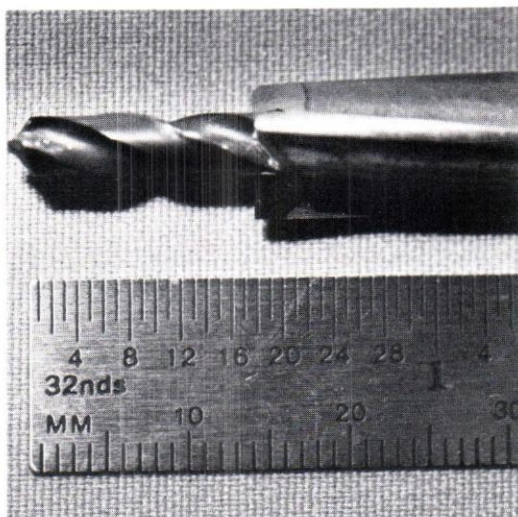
The Otto Bock drill bit makes a $\frac{5}{32}$ " hole in the socket and simultaneously drills a $\frac{3}{8}$ " diameter counter sink in the outer half of the socket wall.
